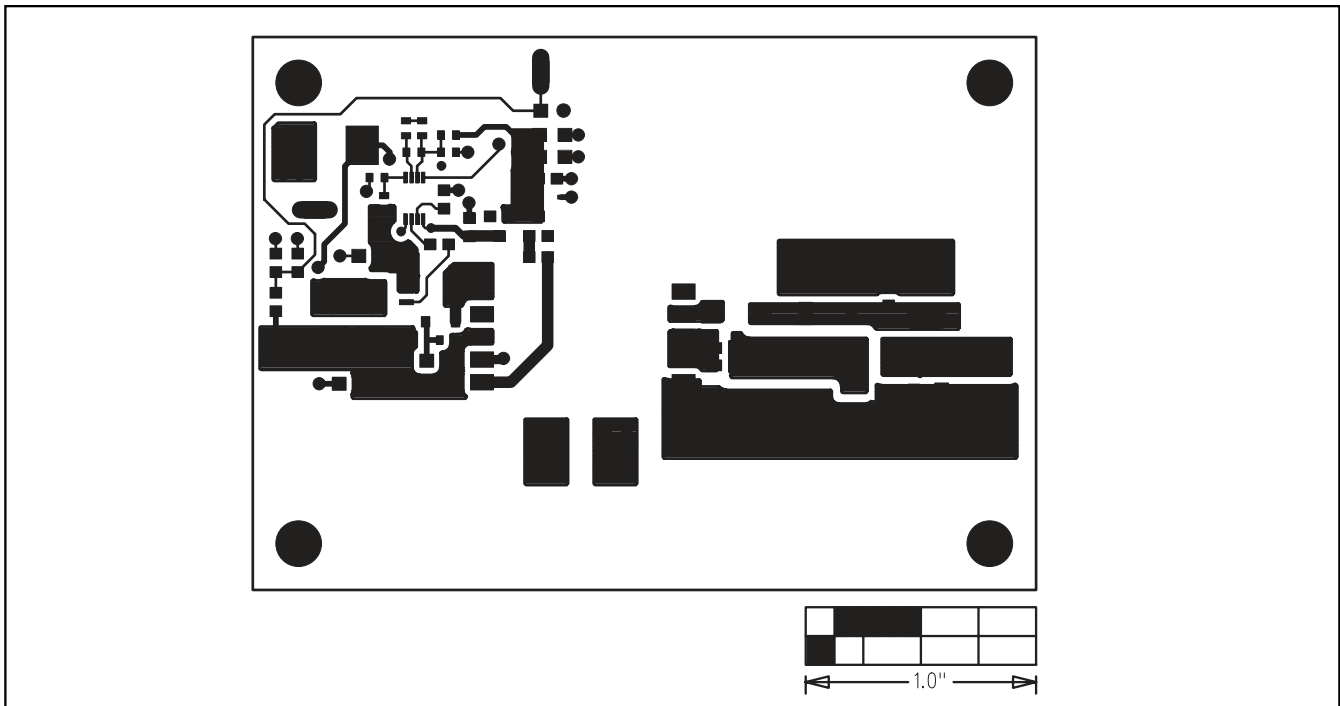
MAX5052A EV Kit PC Board Layout—Component Side
